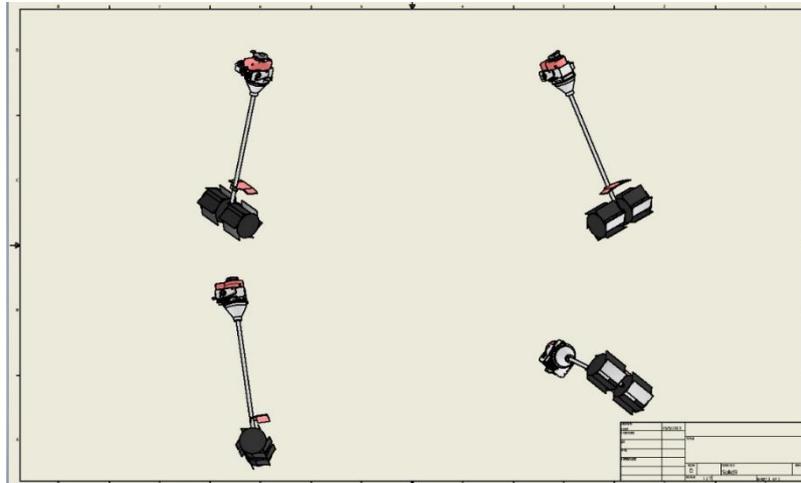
Cultivator, Engine Motor, Aluminium Pipe
